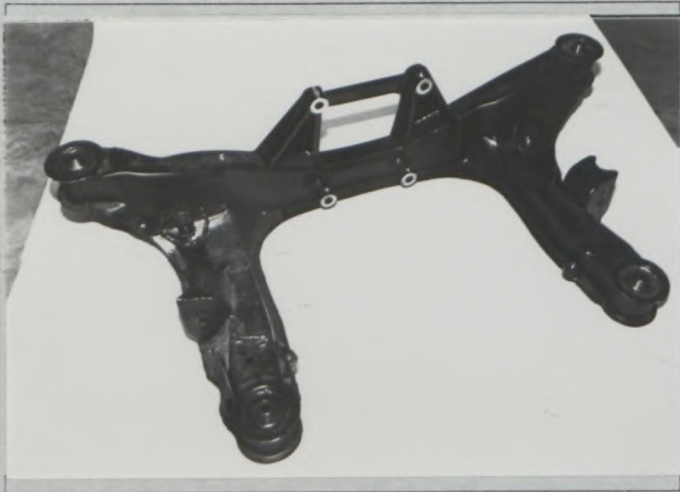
REAR ADJUSTABLE STABILISER ASSEMBLY WITH ANCHORAGE POINTS MODIFIED
